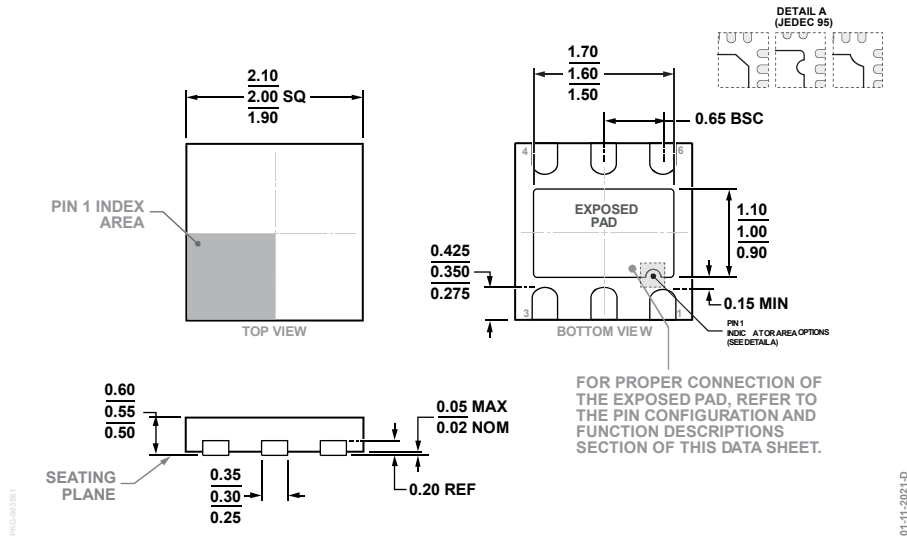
6-Lead, Lead Frame Chip Scale Package [LFCSP] 2mm x 2mm Body and 0.55mm Package Height (CP-6-3) Dimensions shown in millimeters
